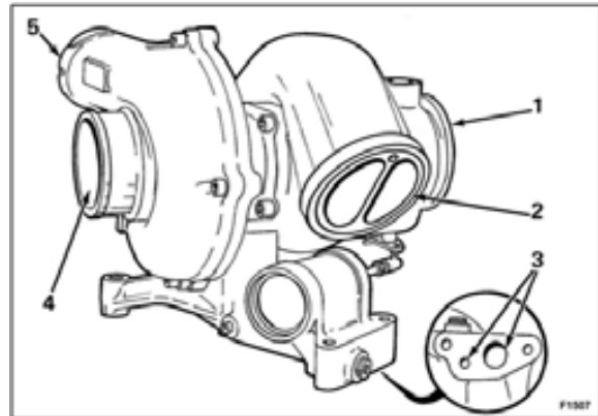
Turbocharger Openings to be Capped (Late 1997 Model Year Shown)
